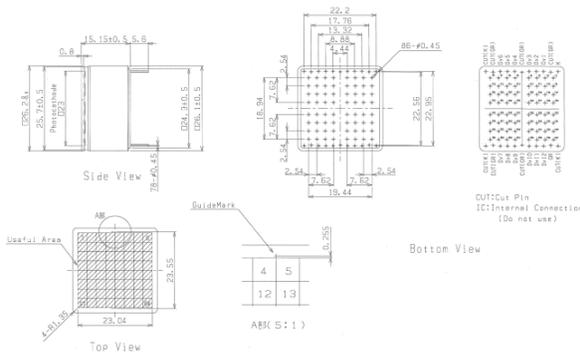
The Dimensional drawing of the MAPMT(R11265-03-M64)
